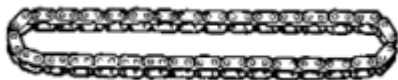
Identifying Oil Pump Drive Sprocket
